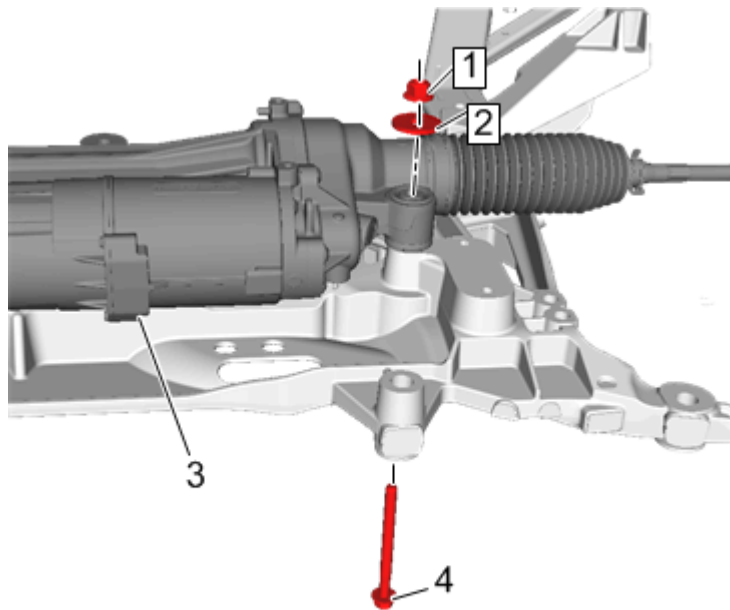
Steering Gear Bolt And Electric Belt Drive Rack and Pinion Steering Gear
